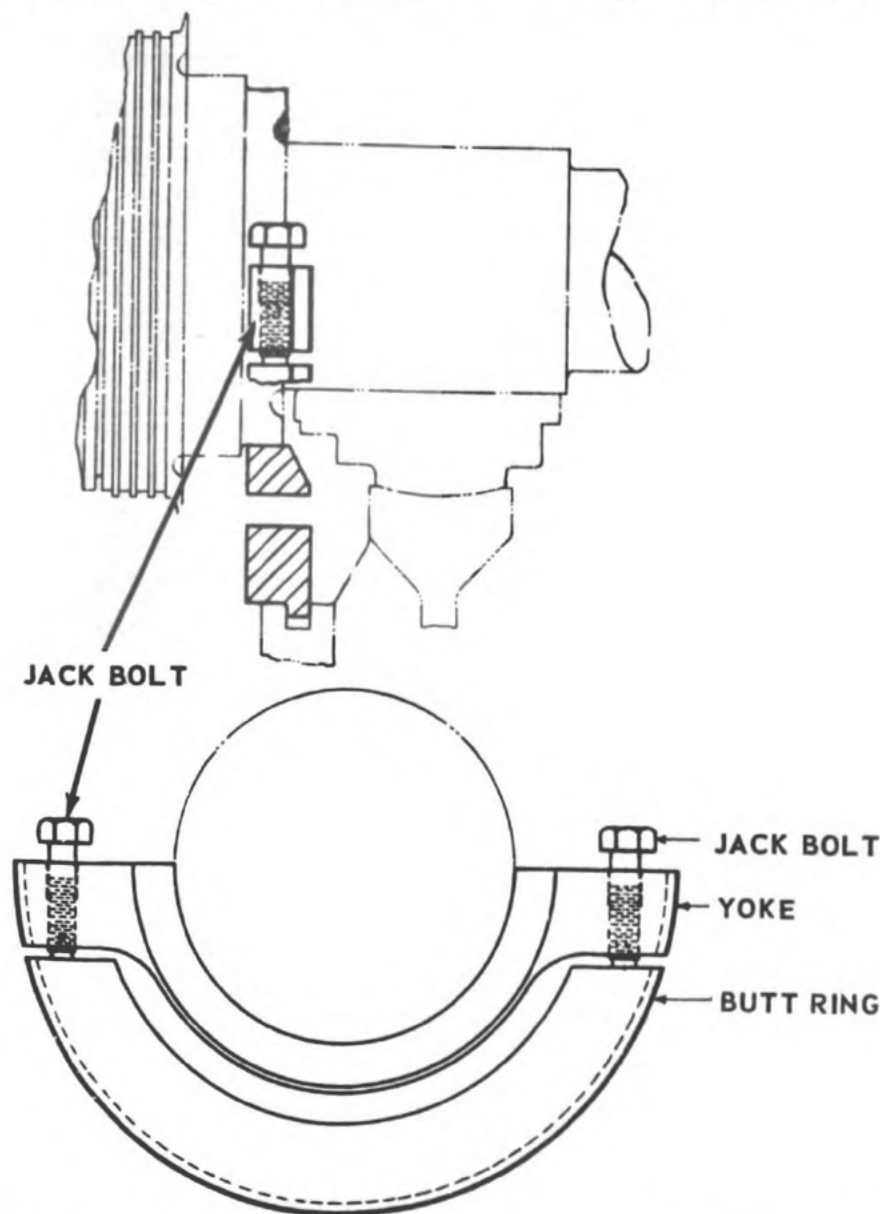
Removing a lower half of a bearing with the aid of a special jack.
